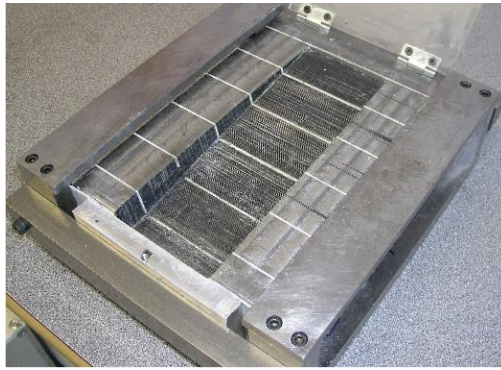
26: example of laminated tools with integrated cooling channels [44].
